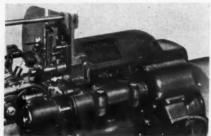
Motor Drive for Cross Drilling and Turret Drilling Attachments
